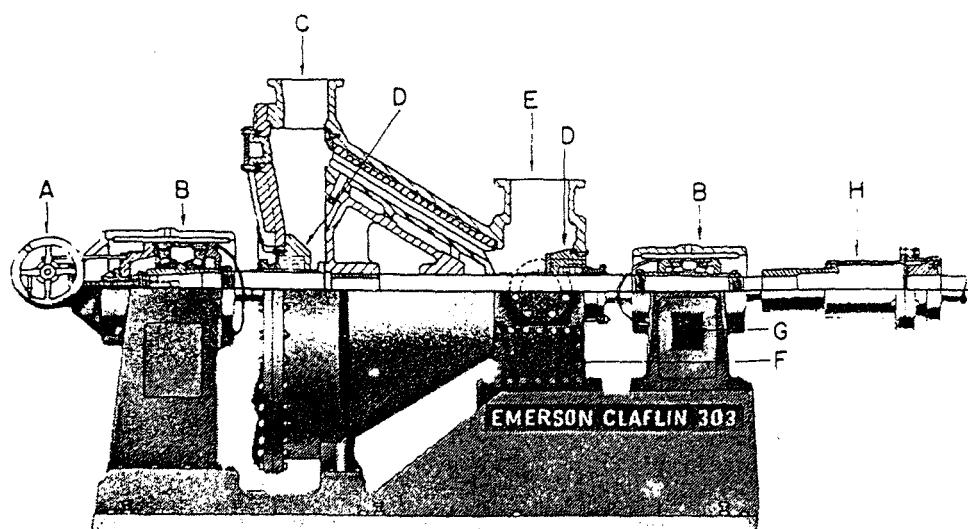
Emerson Claflin refiner. (A) Plug adjustment mechanism, (B) bearing assemblies, (C) stock outlet, (D) packing boxes, (E) stock inlet, (F) cleanout, (G) oil-mist lubrication, (H) coupling, coupling. (Emerson Mfg. Co.)
